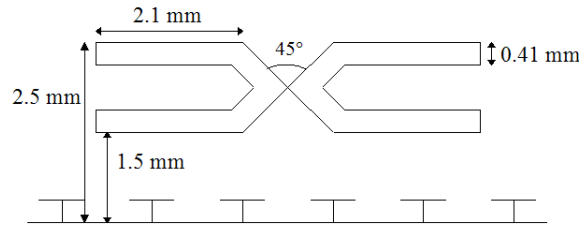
Dimensions of the design proposed as medium gain prototype.
